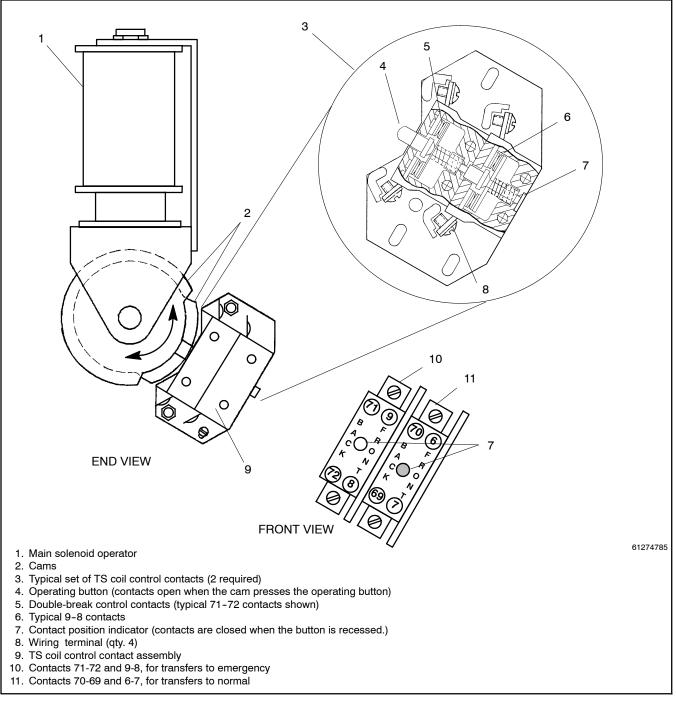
TS Coil Control Contact Locations with Main Solenoid Operator
